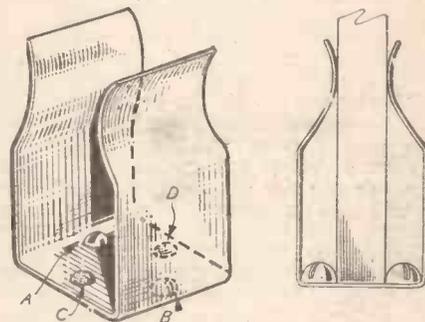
How to make the glass clip for Fig. 4. C and D are soldered ends of the contacting wires.
